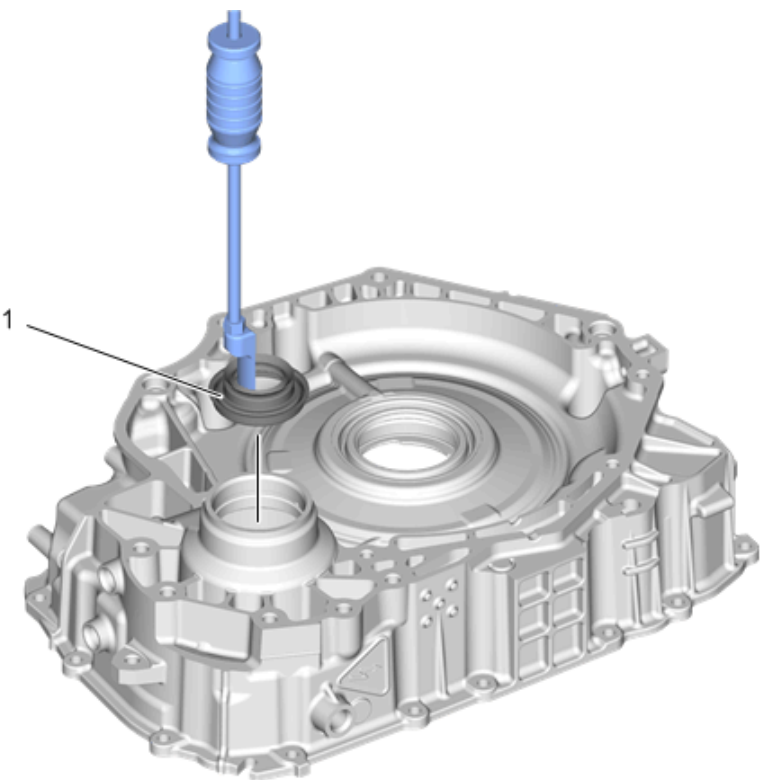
Front Wheel Drive Shaft Oil Seal - Right Side
